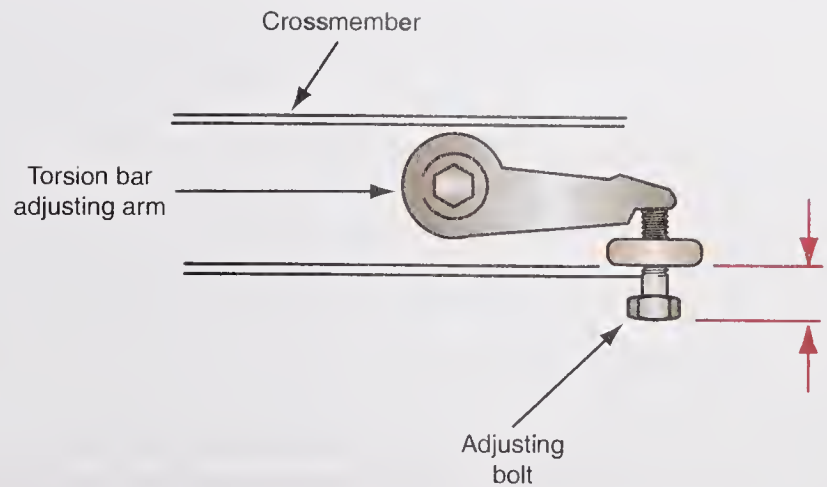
Measuring the torsion bar adjusting bolt position.
